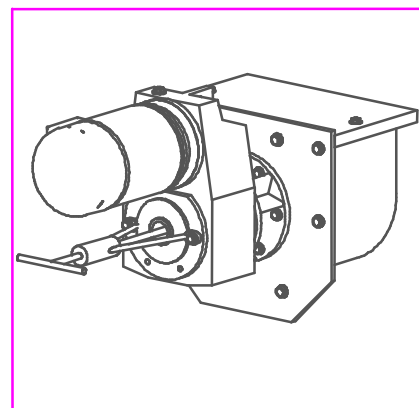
Remove the Locking Bolt, Spring Washer and Stepped Spacer
